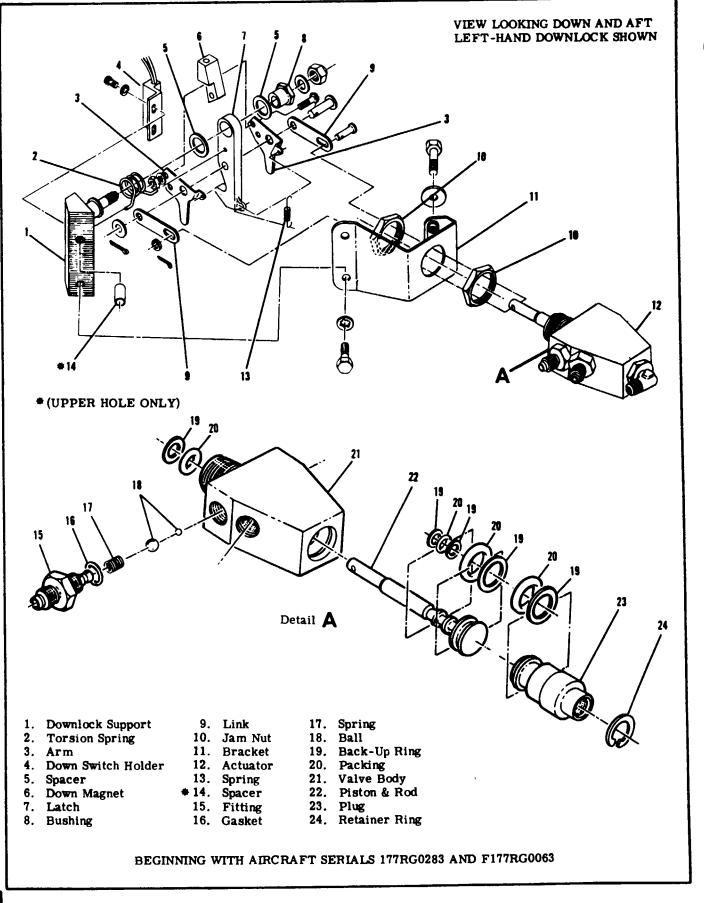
Main Landing Gear Downlock Assembly (Sheet 3 of 3)
